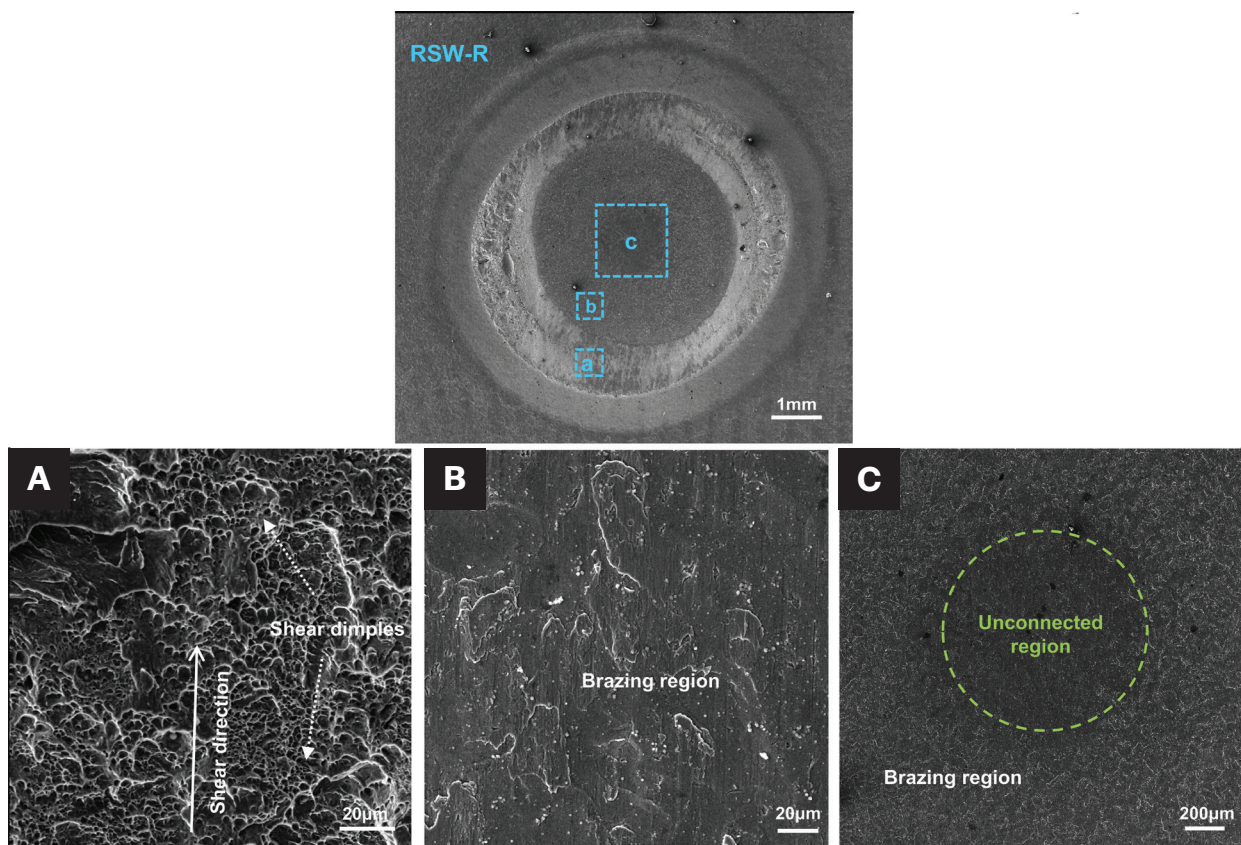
Typical SEM images of the IF fracture surfaces of the joints under RSW-R conditions.
